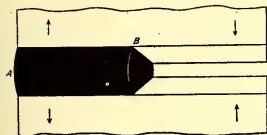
STRAINS PRODUCED BY COOLING OF THE METAL IN THE WELD
